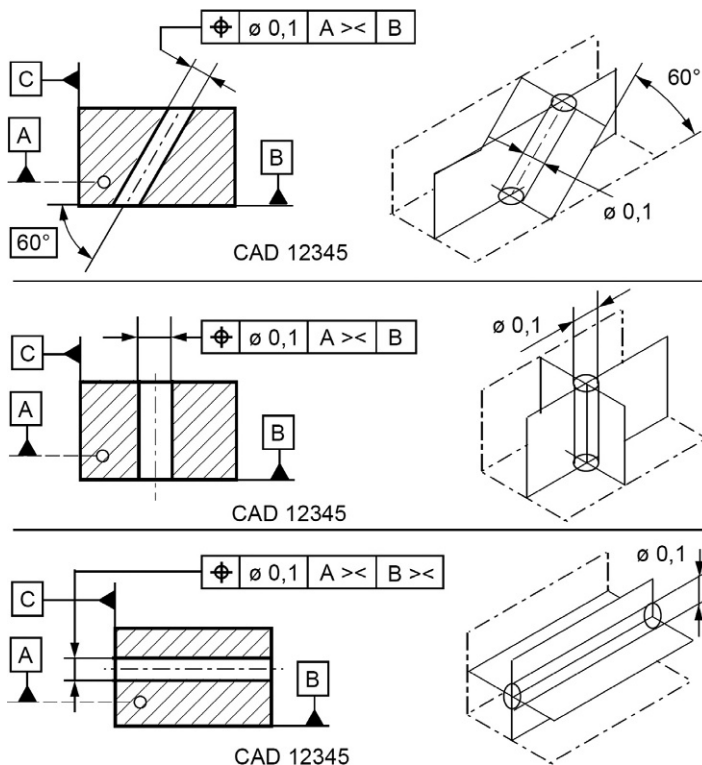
Cylindrical position tolerances for orientation
